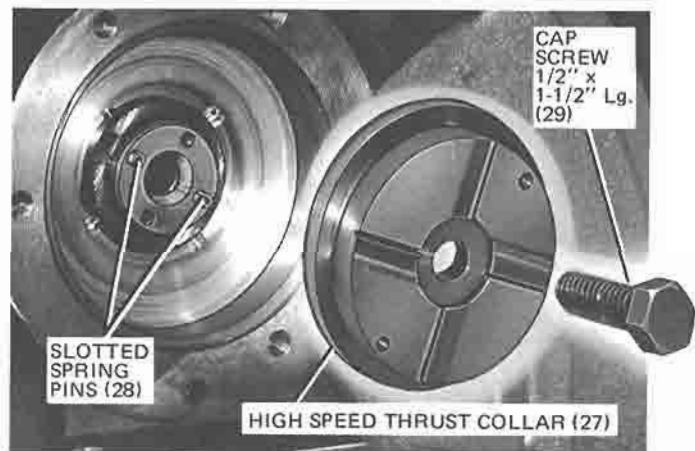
ASSEMBLING REAR HIGH SPEED THRUST COLLAR
